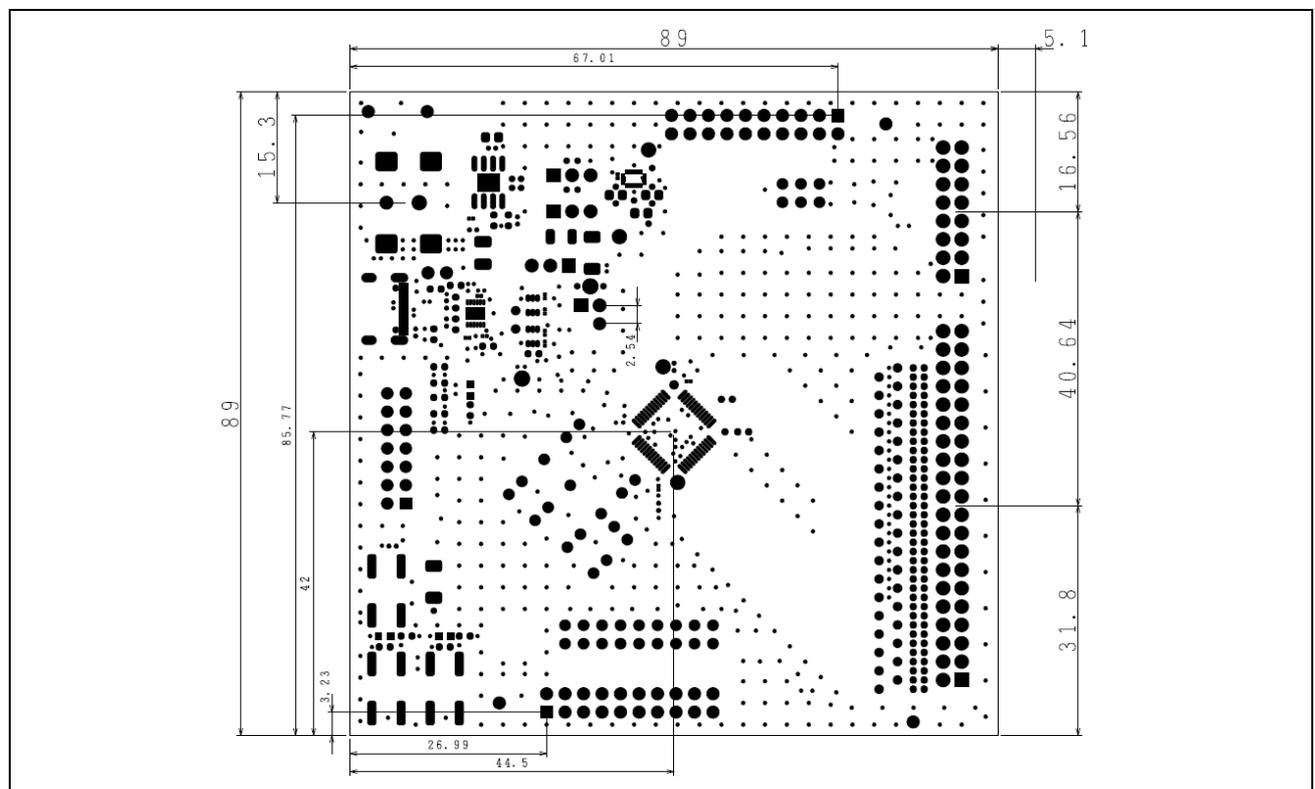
RL78/F22 Cap Touch CPU System Board Dimensions
